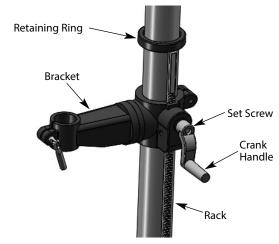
Attach bracket, rack, retaining ring and crank handle 9680342C.
